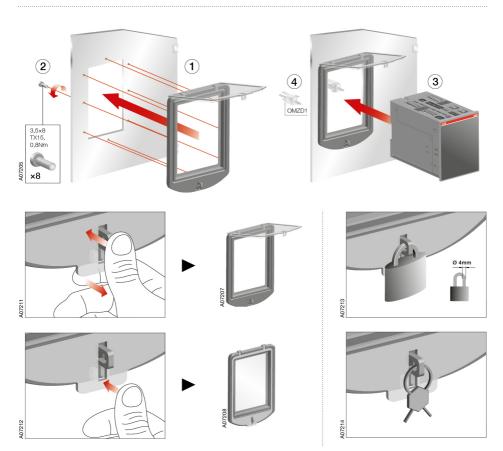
Door drilling and mounting of the cover plate OMZC2, when the automatic control unit OMD800 is mounted on the door
